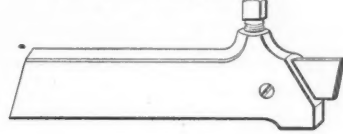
Straight and Offset Cutting-off Tool-holders made by the Ready Tool Co.
